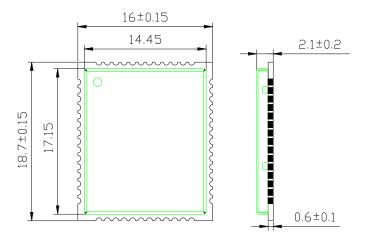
MC60 Top and Side Dimensions (Unit: mm)
